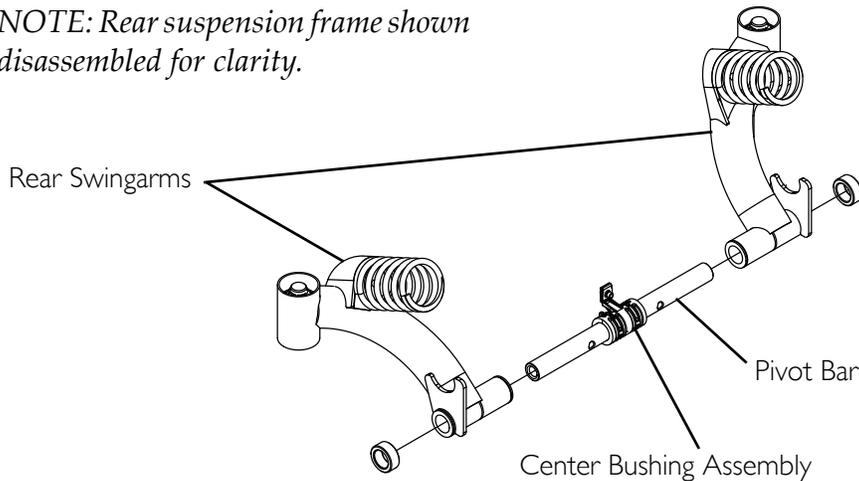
Removing/Installing the Rear Suspension Assembly
